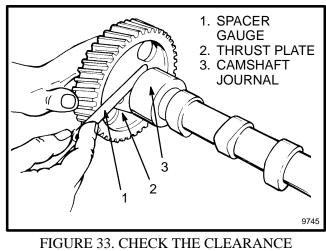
CHECK THE CLEARANCE BETWEEN THE CAMSHAFT AND THE THRUST PLATE
